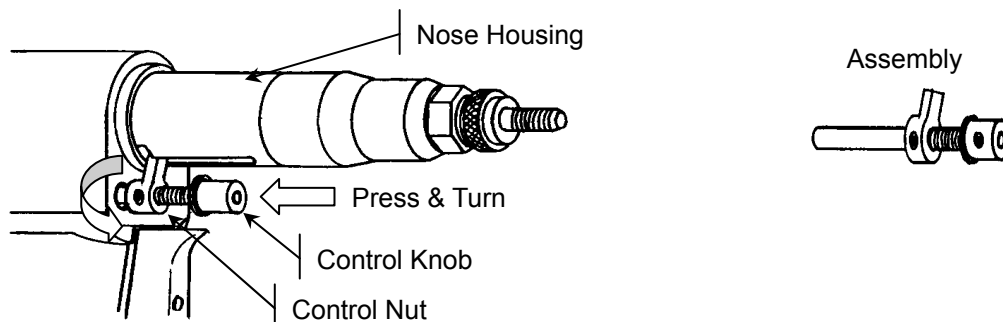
Replacing the Control Nut and T-Valve Push Rod
